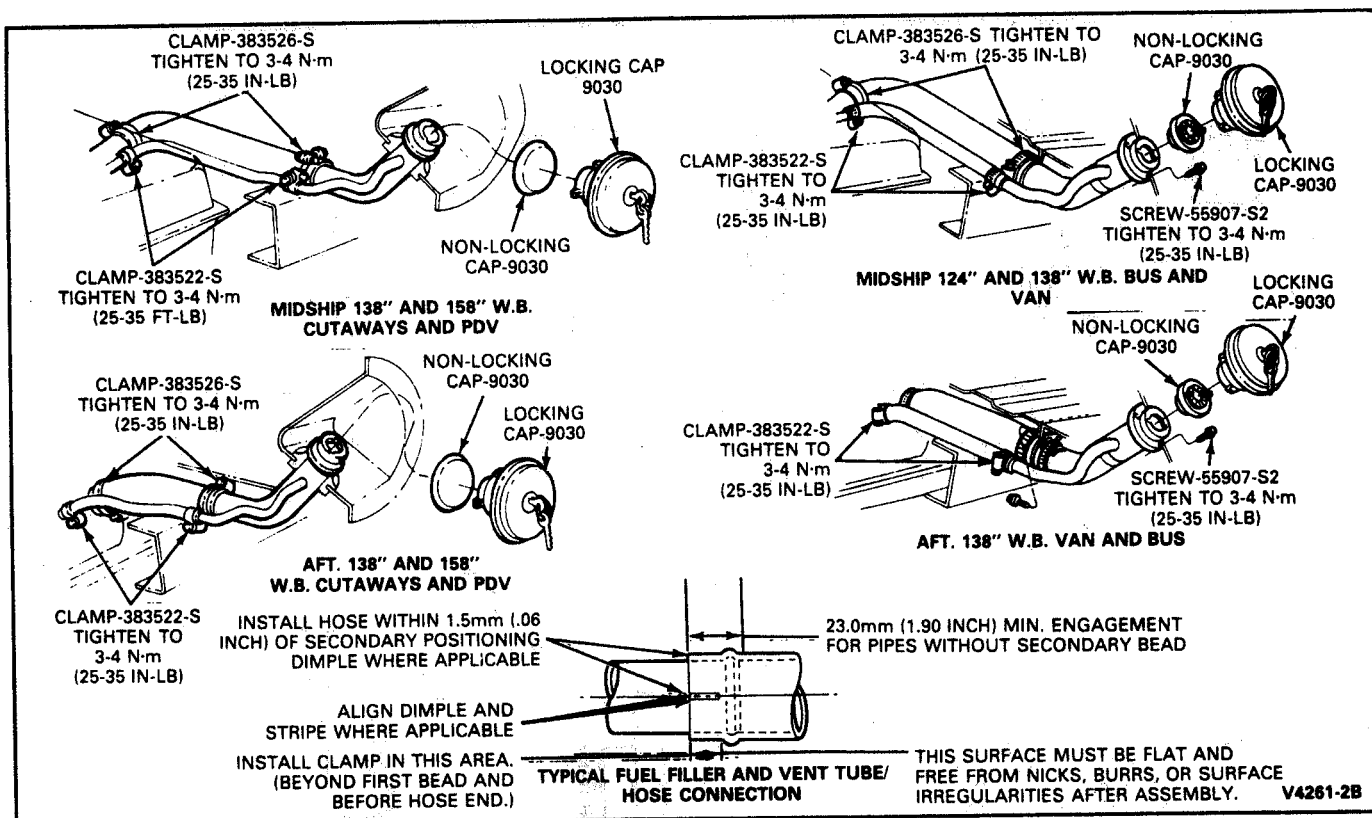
Fuel Filler System Installation—E-250—E-350 (Midship and Aft Tank)
